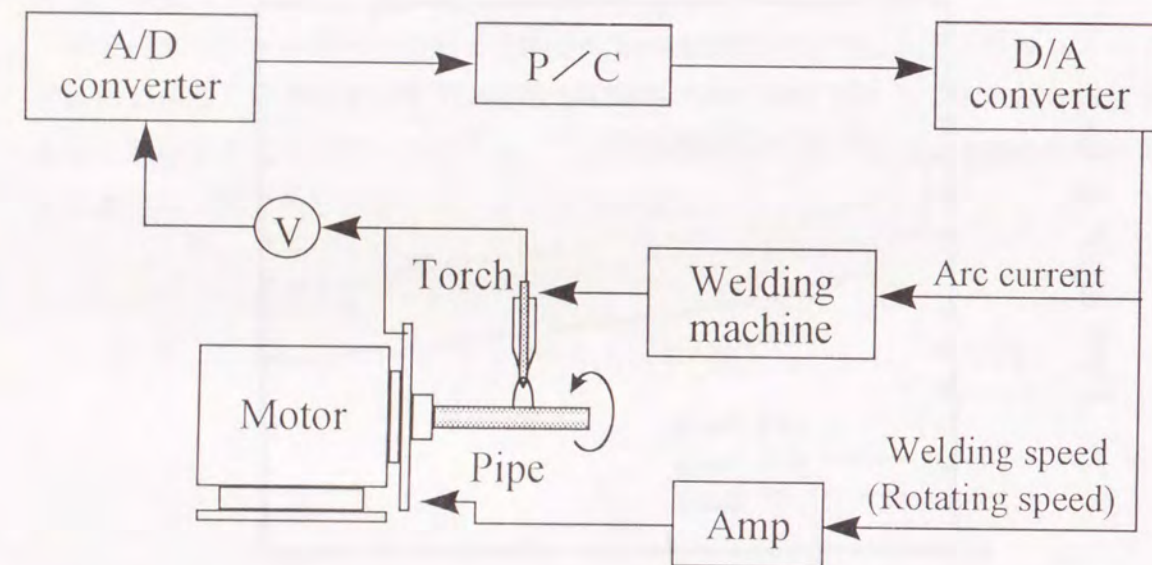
Schematic of GTA welding apparatus on rotating pipe
